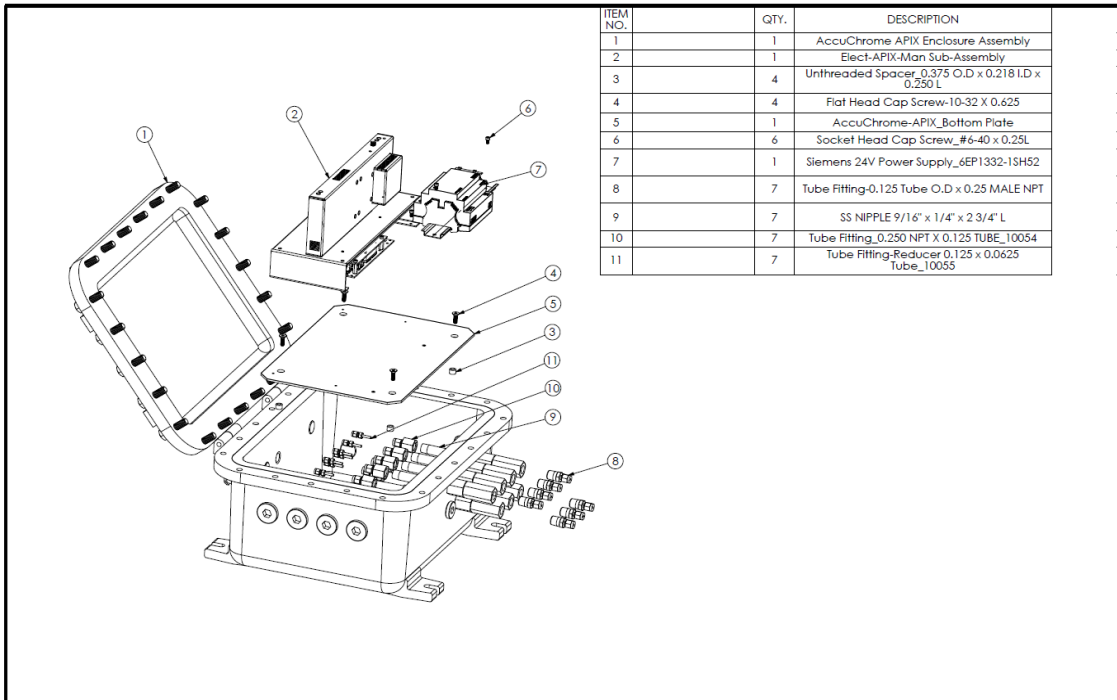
NEMS C9 Module assembly shown with explosionproof enclosure for Class I Div 2.
